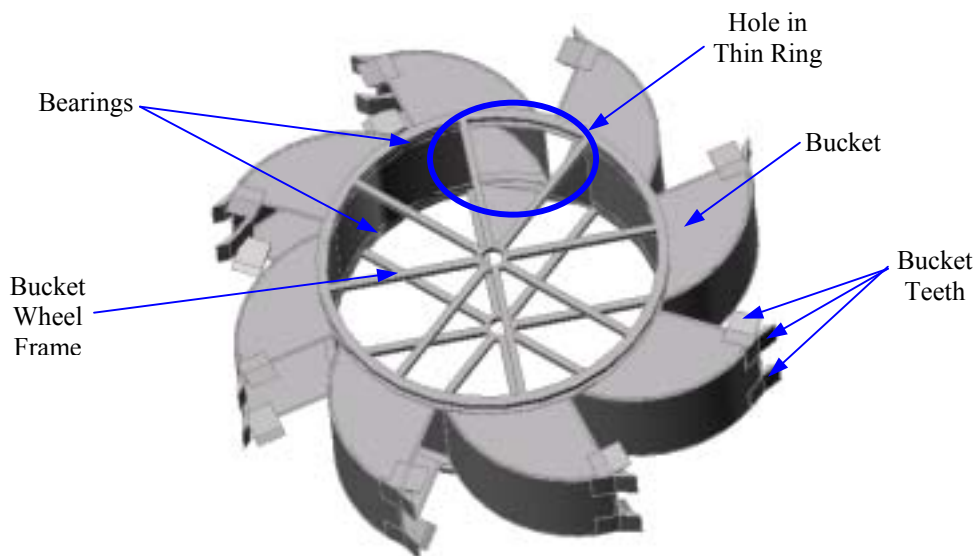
Picture of bucket wheel with hole in thin circular ring for regolith to exit buckets
